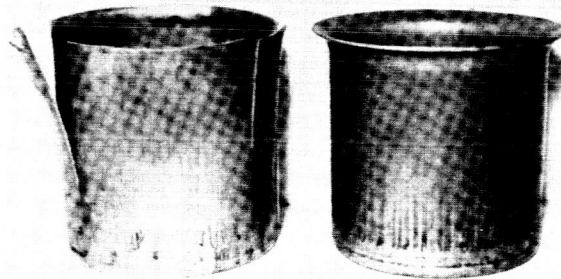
MONEL SHELLS DEEP DRAWN FROM HARD BLANKS WITH AND WITHOUT A FLANGE
